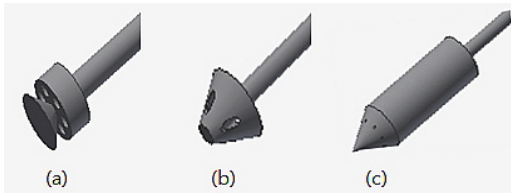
Piston head design using wake fluid friction in linear damper system (a)Cone, (b)Umbrella, (c)Harpoon type
